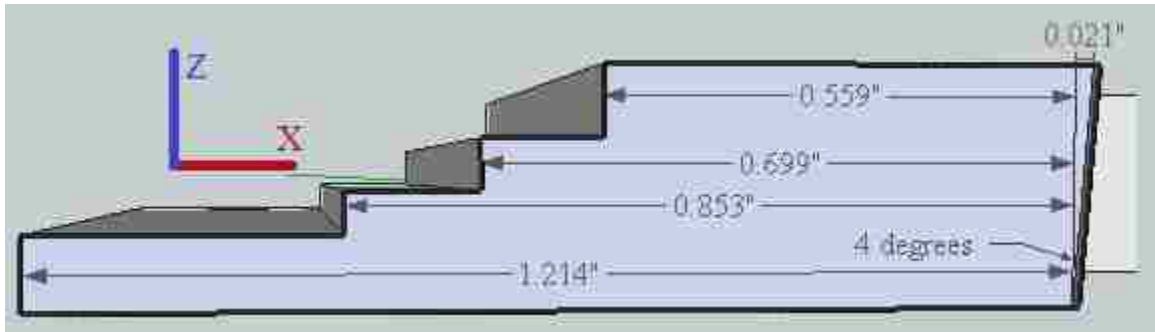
Cross sectional view of the 10x10 cm² middle trimmer lead plate illustrating the in-plane and cross-plane lateral dimensions of the plate. The middle trimmer is square, such that all non-hole dimensions are equal in the in-plane and cross-plane dimensions.
